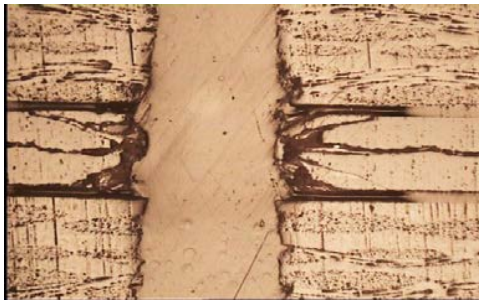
Cross section of mechanically drilled 0.8 mm diameter via through the hybrid-assembly showing cracks
